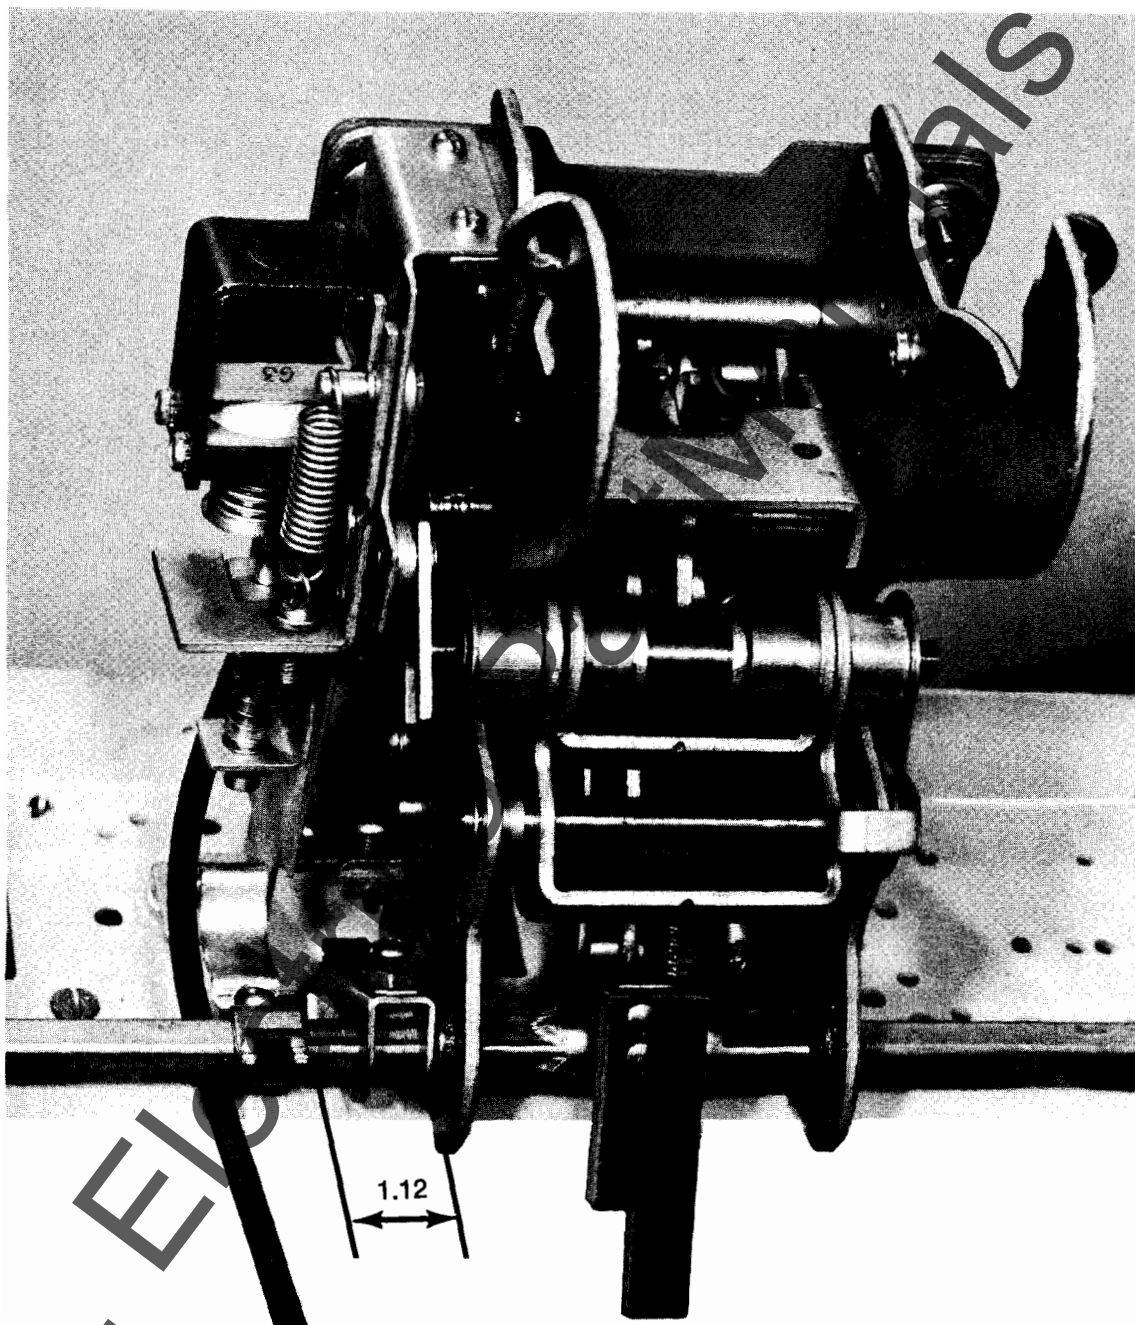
Rear view of front frame showing location of trip paddle for flux shift trip device.
